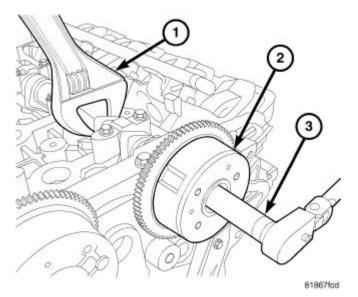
Removing & Installing Camshaft Phaser Courtesy of CHRYSLER GROUP, LLC
